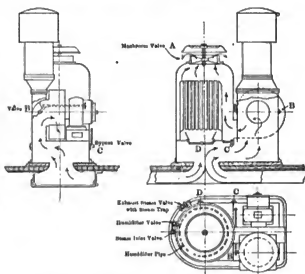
TOP-SUCTION DECK-TYPE THERMOTANK EXHAUSTING AIR.
